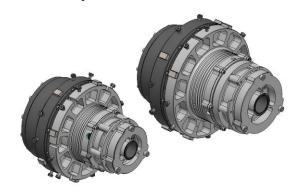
Joint drive units – elbow/wrist (left) and shoulder (right).
